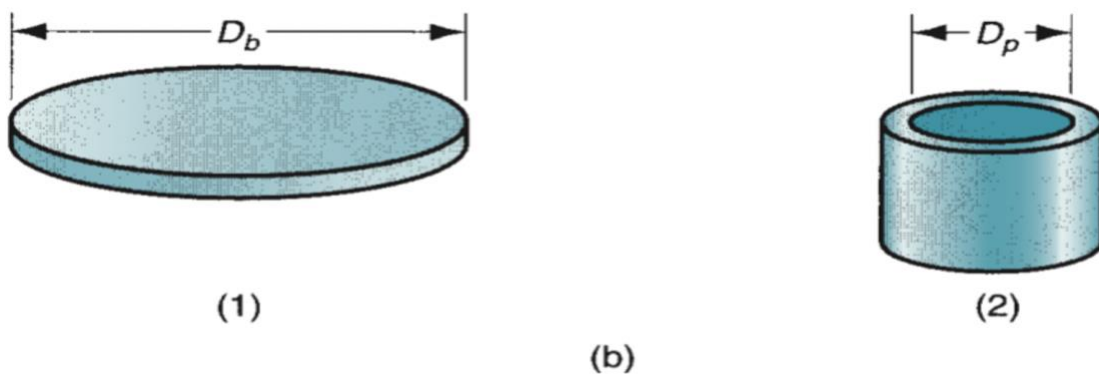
(b) corresponding work part: (1) starting blank, and (2) drawn part. Symbols: c = clearance, D_b = blank diameter, D_p = punch diameter, R_d = die corner radius, R_p = punch corner radius, F = drawing force, F_h = holding force.
